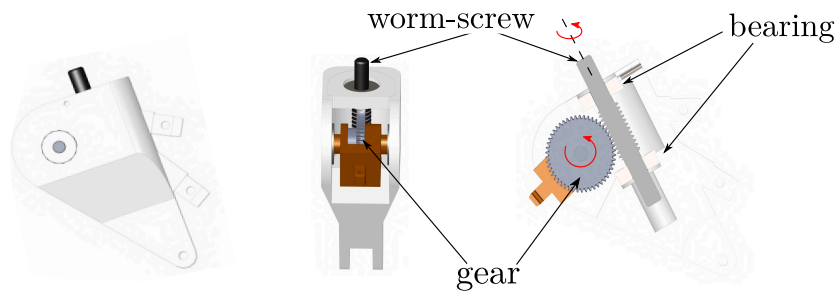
CAD view of gear box of FG-MAQ robot
